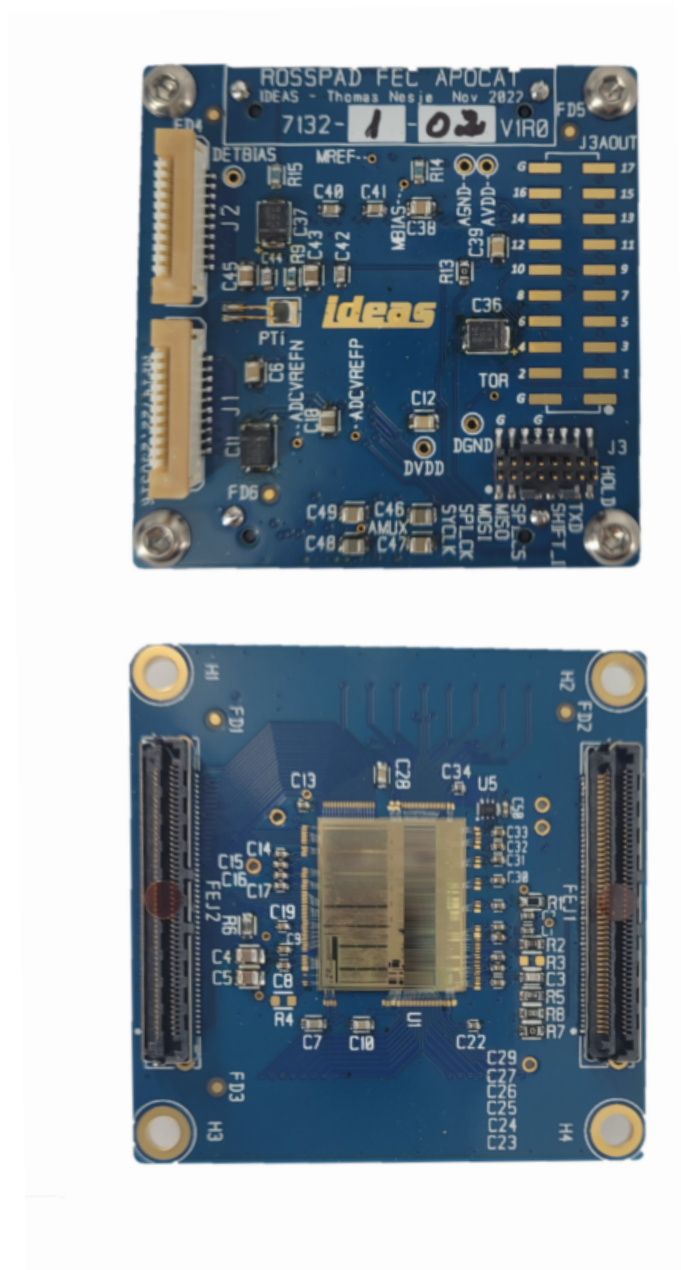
The Front end BOARD top and bottoms side, with the implemented APOCAT
